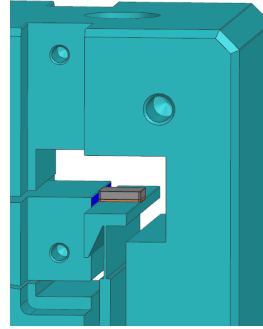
Exploded view of alignment mechanism (with reticle and carrier)
